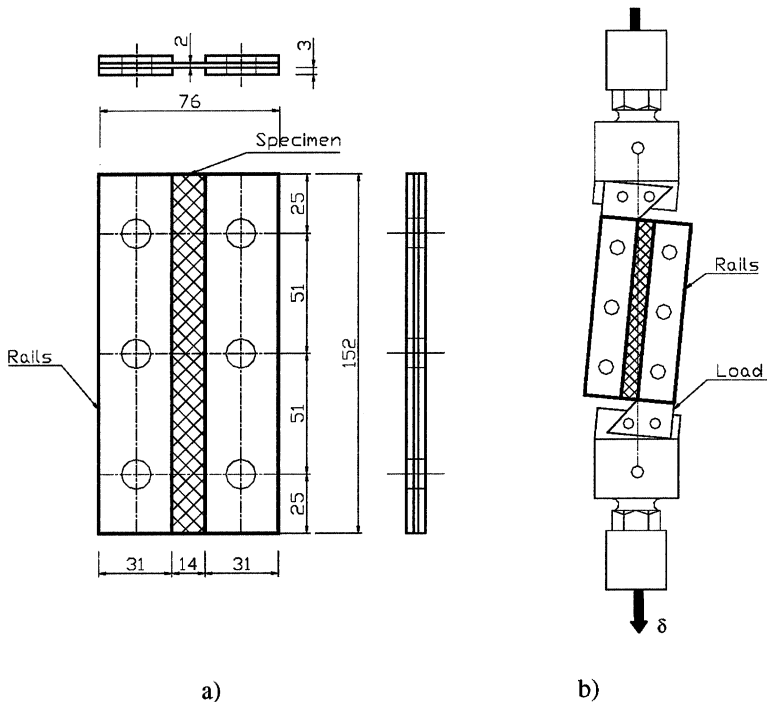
(a) Geometry of the specimen, (b) testing machine.
